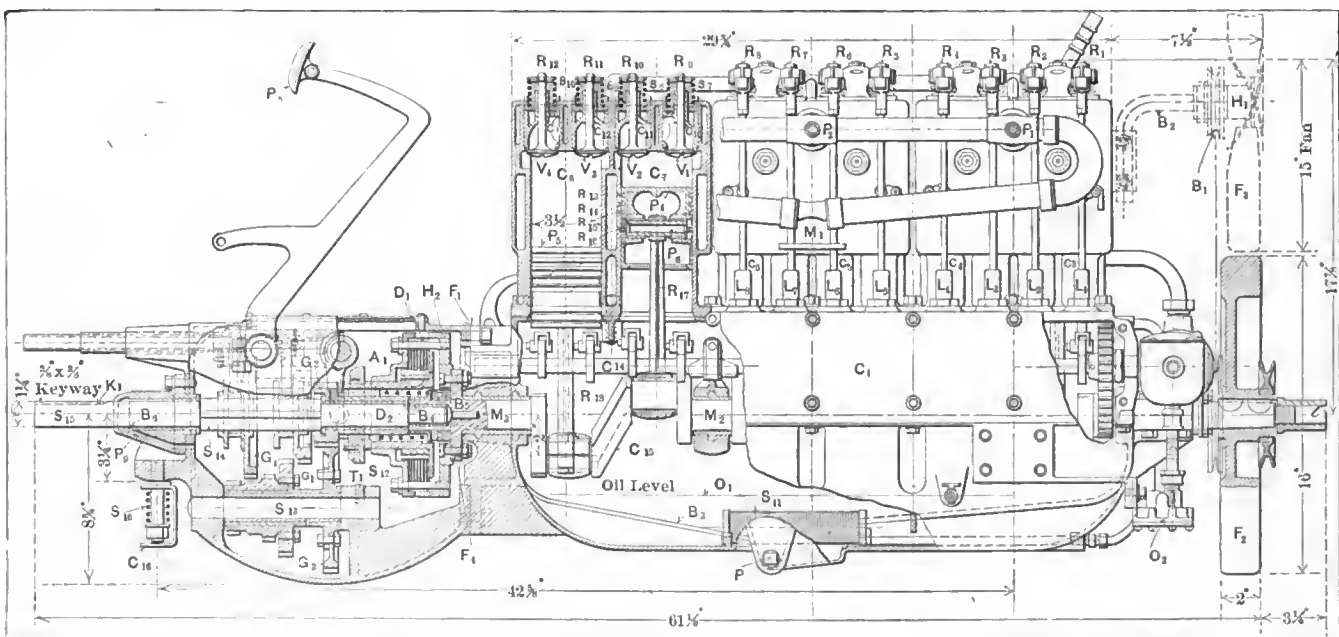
Sectioned elevation of the six-cylinder Brownell motor, offering evidences of refinement and special means of lubrication
